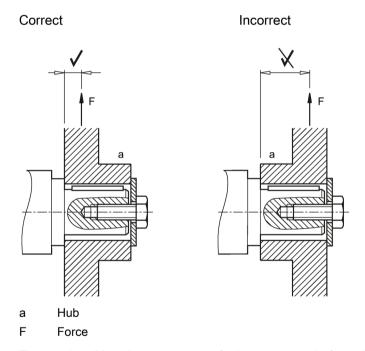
Mounting arrangement for low stress on shafts and bearings
